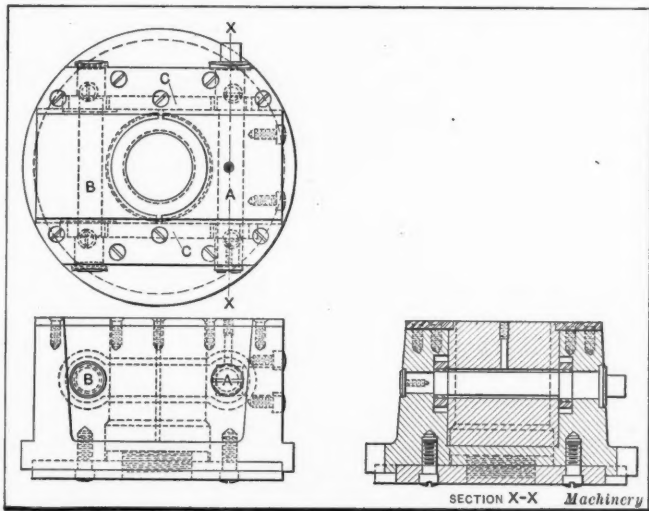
Plan, Side and Cross-sectional Views of Self-centering Chuck
